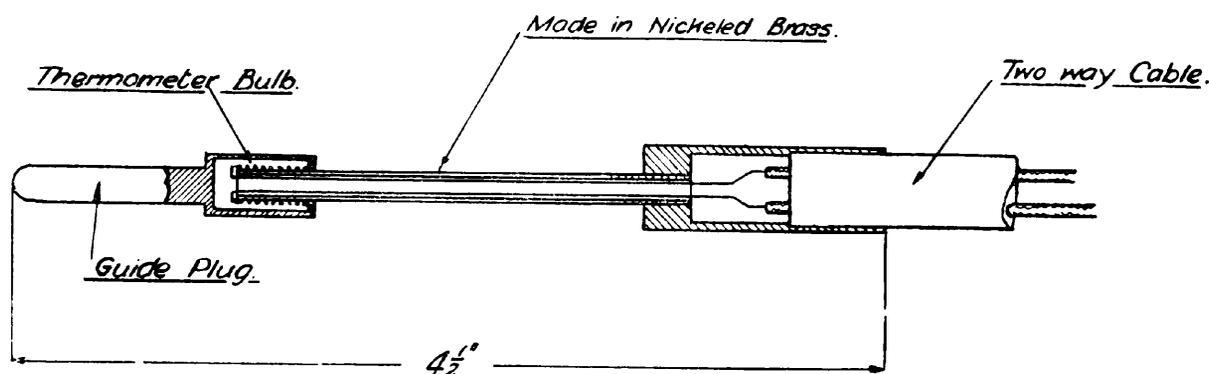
SPECIAL RESISTANCE THERMOMETER
